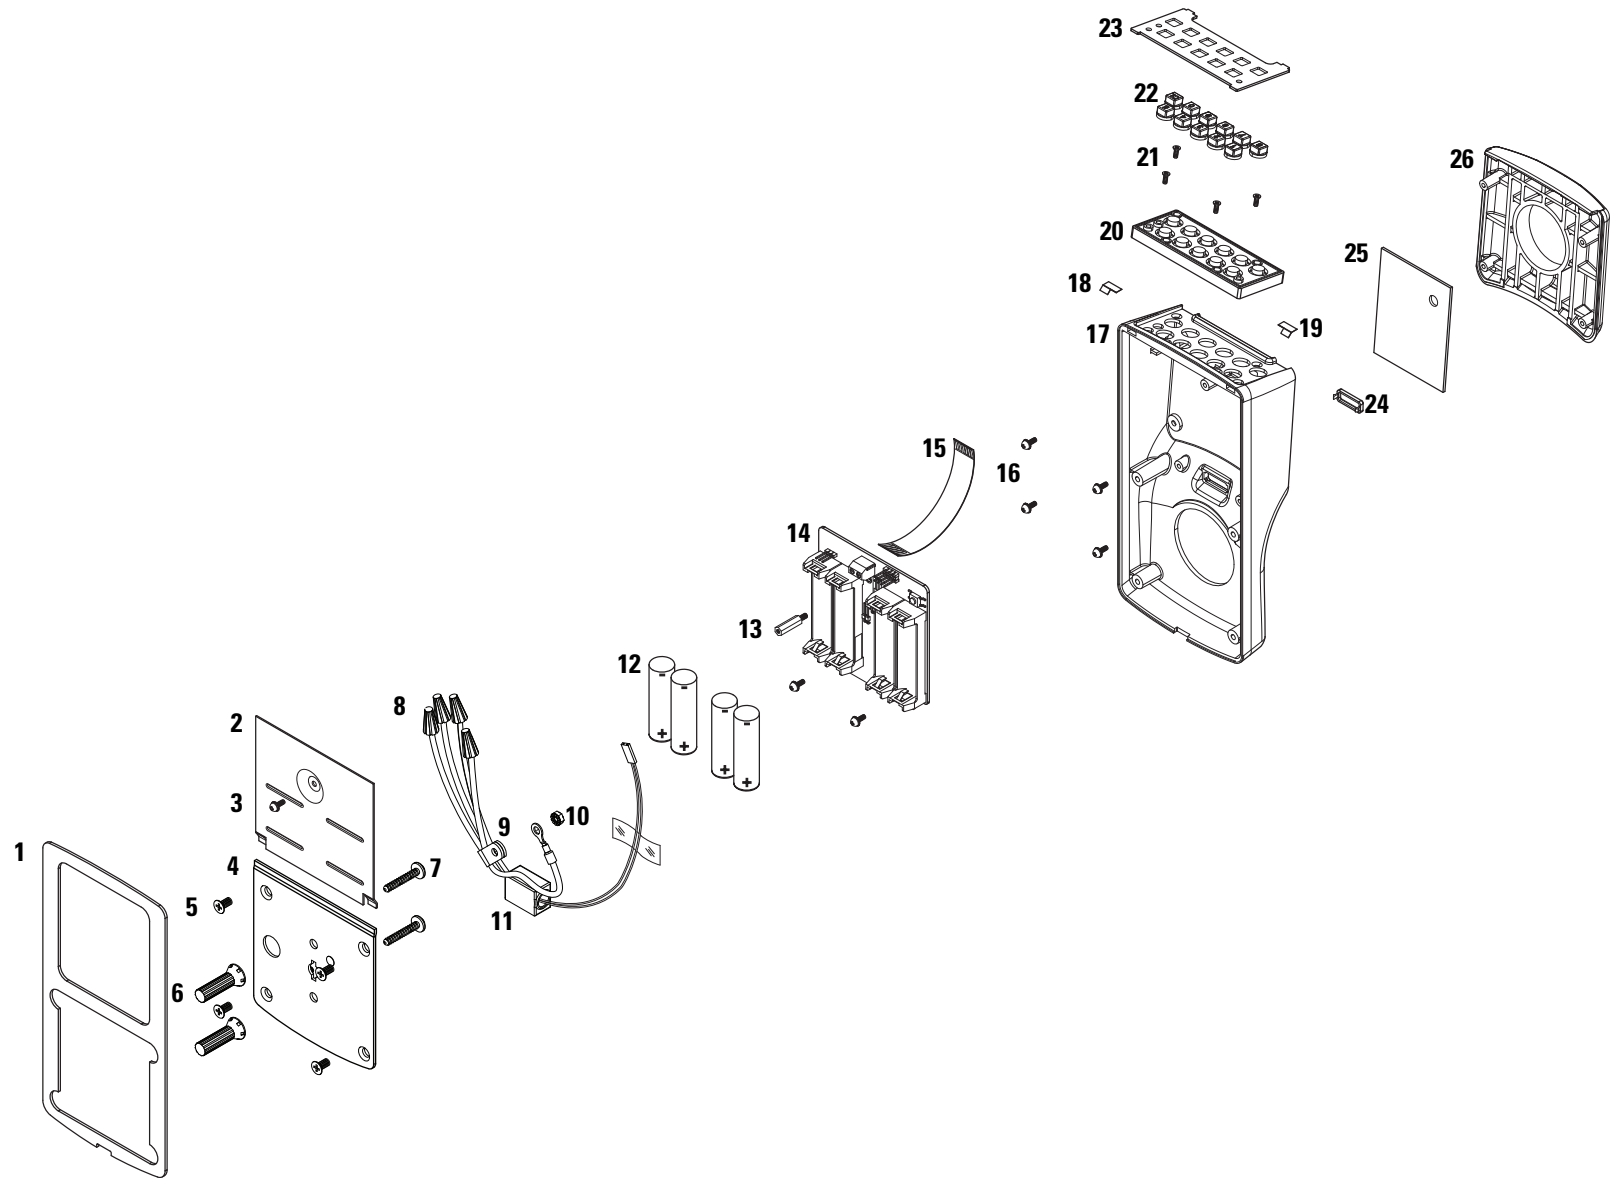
Keypad reader escutcheon assembly (500 series shown)
